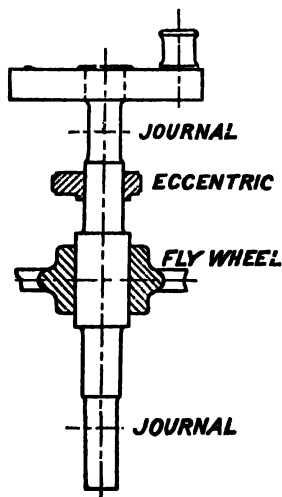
Crank-shaft of engine shown in Fig. 23.
